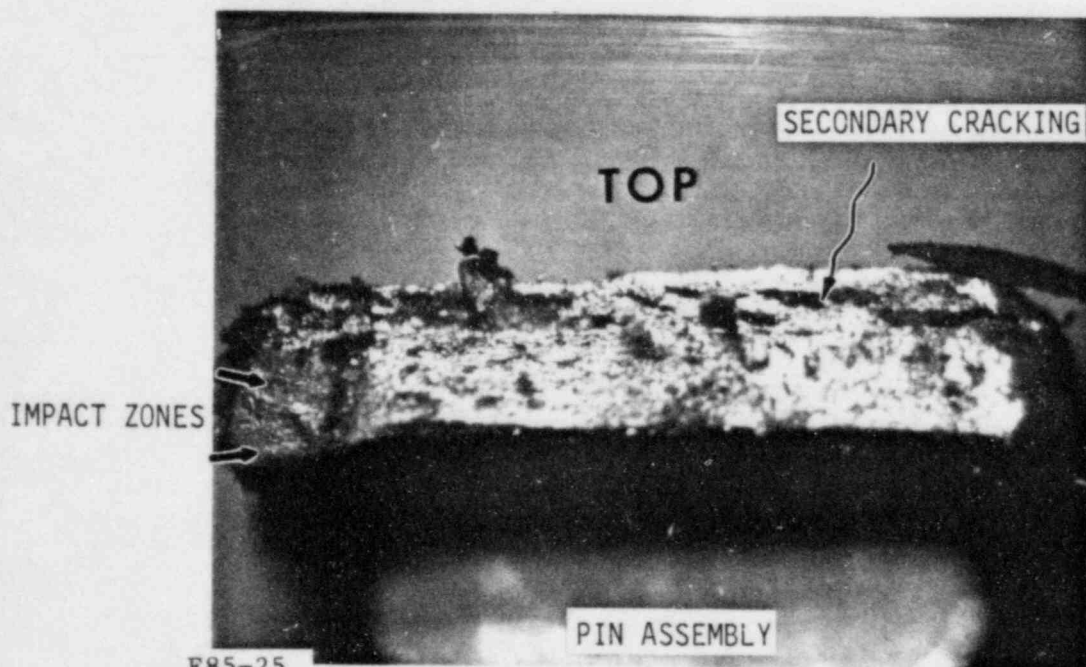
Fractograph of the Large Fracture, End "A", of Spring DB-5. 8X.
